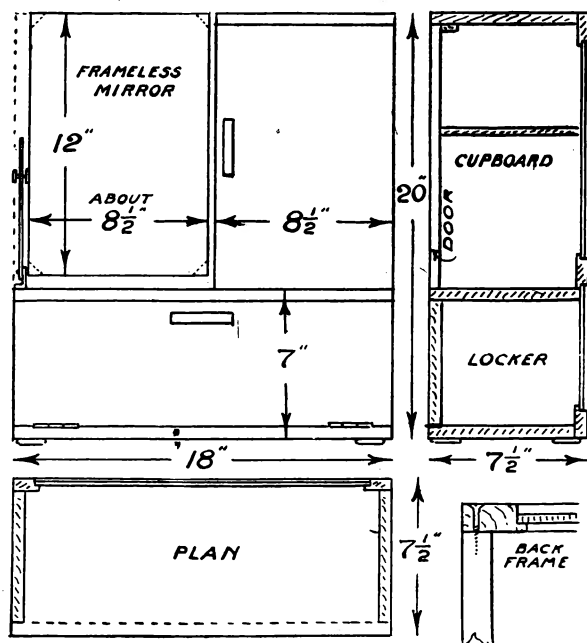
(Right). FRONT ELEVATION, SIDE SECTION, PLAN, AND ENLARGED DETAIL OF BACK.
